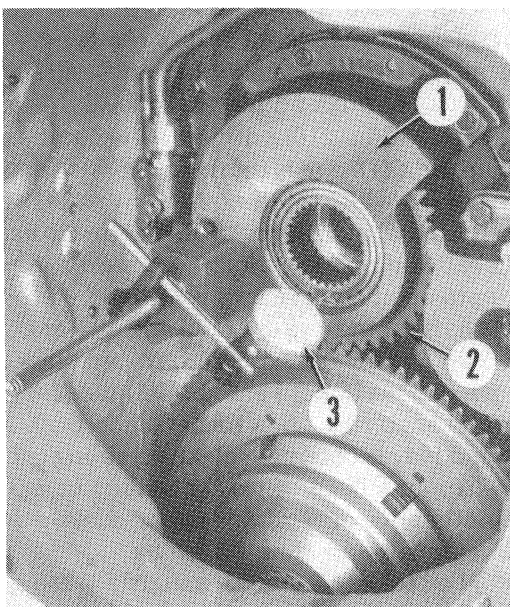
A—Use a dial indicator (3) to check end play of pto drive gear (2).
